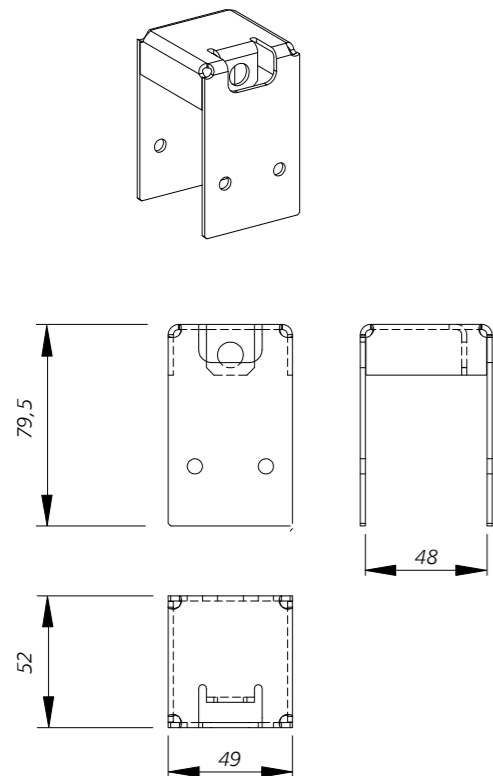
Sliding console for mounting type G spindle actuator with shifted pivot point on the smoke exhaust window, dimensions [mm]
